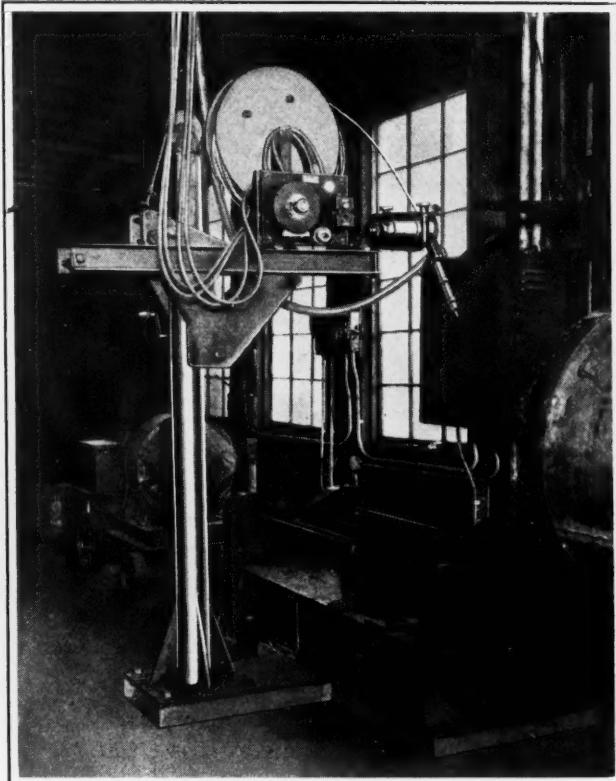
Automatic Welding Equipment Used for Joining Sections of Well Casing
